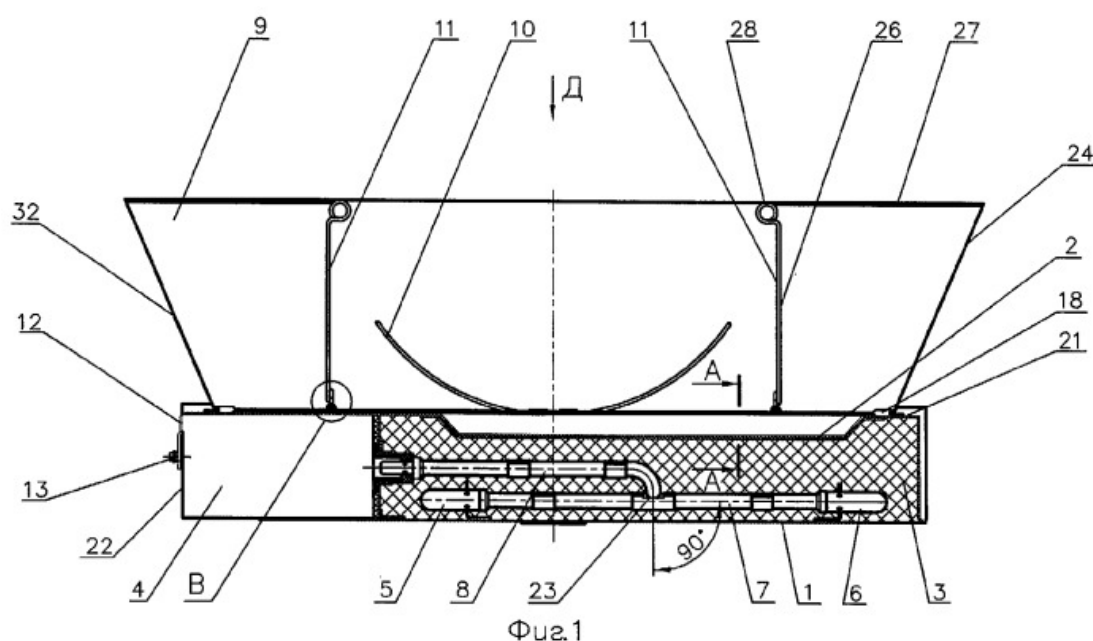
A technical drawing of a PTM-4 mine with its wire frame and fabric unfolded. Note the safety pin (13), the dual explosive initiators (5 & 6), and the unfolded wire frame (26) holding up the fabric cover (27) (source: Baturin, et al., n.d.).
